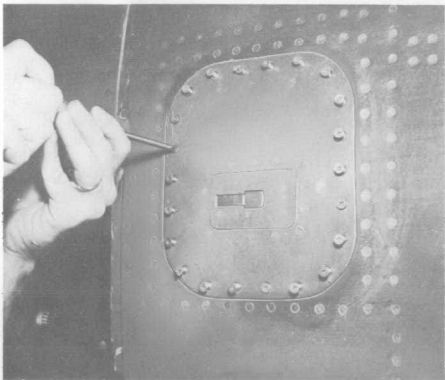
Access Door Weather Sealing (Sheet 1)
